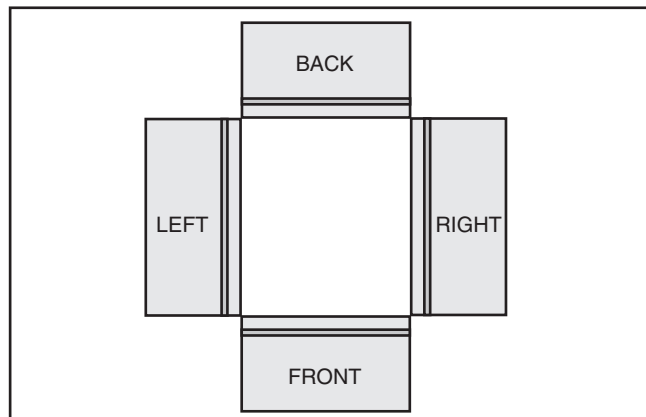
Drawer pieces laid out and marked; the inside of the drawer pieces are face up.
